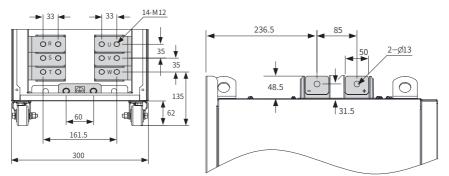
Main circuit terminal dimensions of MD880-01S-0441-4/MD880-01S-0481-4 (without side entry copper busbar and output reactors)
